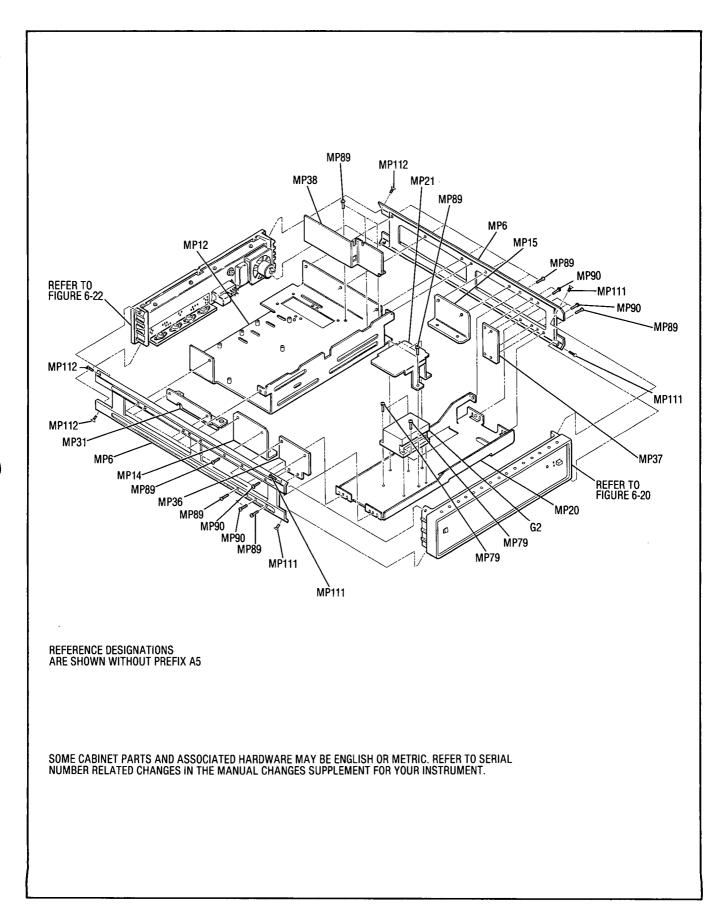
Lower Unit (A5) Cabinet Parts Identification
